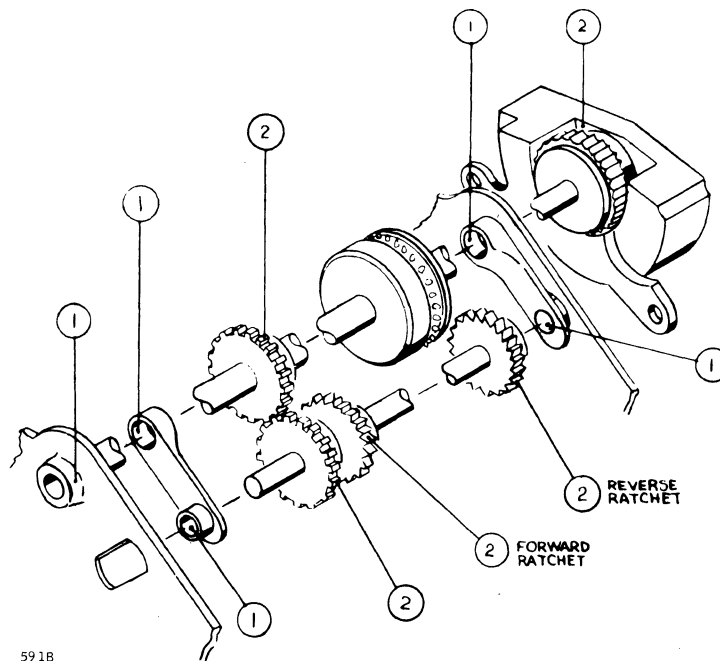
Ratchet, Gear, and Pawl Lubrication Points
